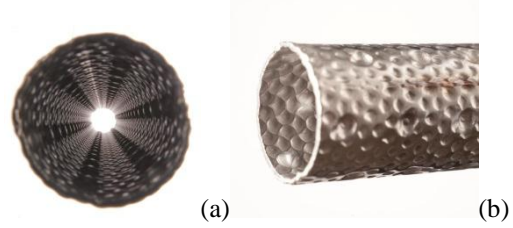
(a) Cross Sectional View (b) Outer Surface of the 1EHT Enhanced Tube
